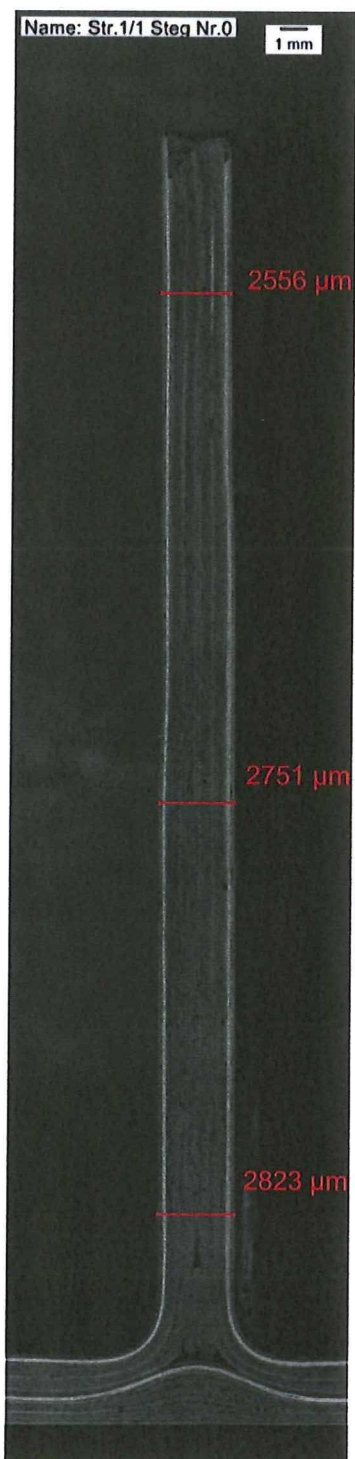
Cross section of panel 1 stringer 1 skin
